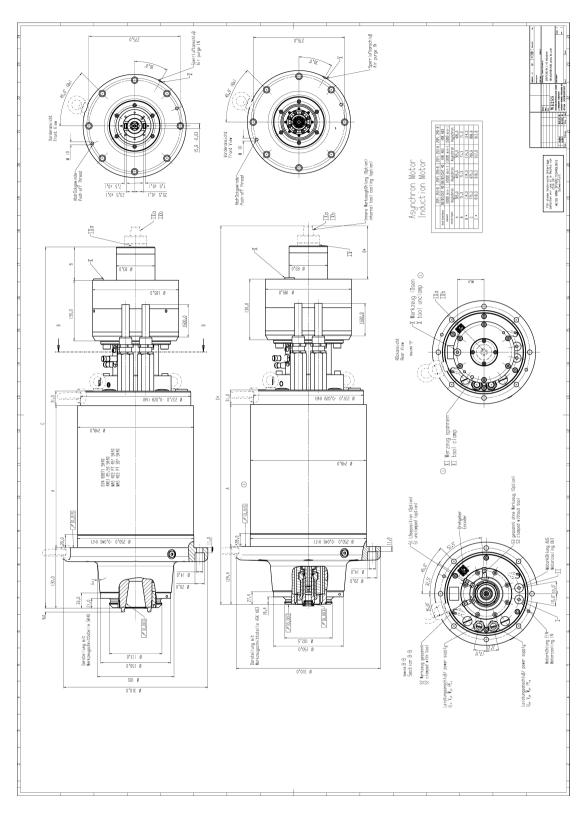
Dimension drawing, spindles 2SP125 -8 0 (pneumatic release unit)
